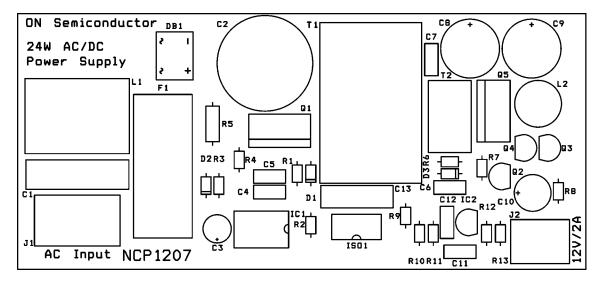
Printed Circuit Board Layout – Silkscreen Component Side
